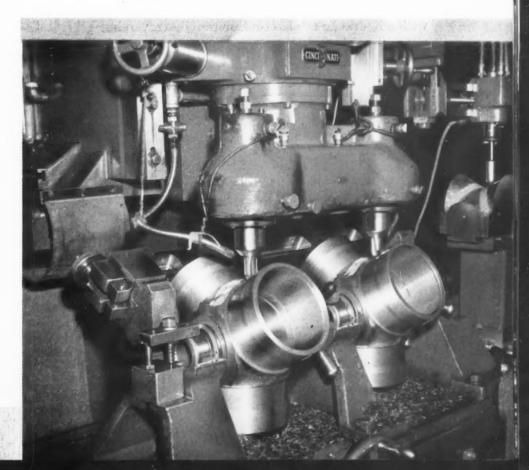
Drum Fixture and Tooling Used in Performing Three Operations on Three Hub Barrels with Nine Indexings of the Fixture
